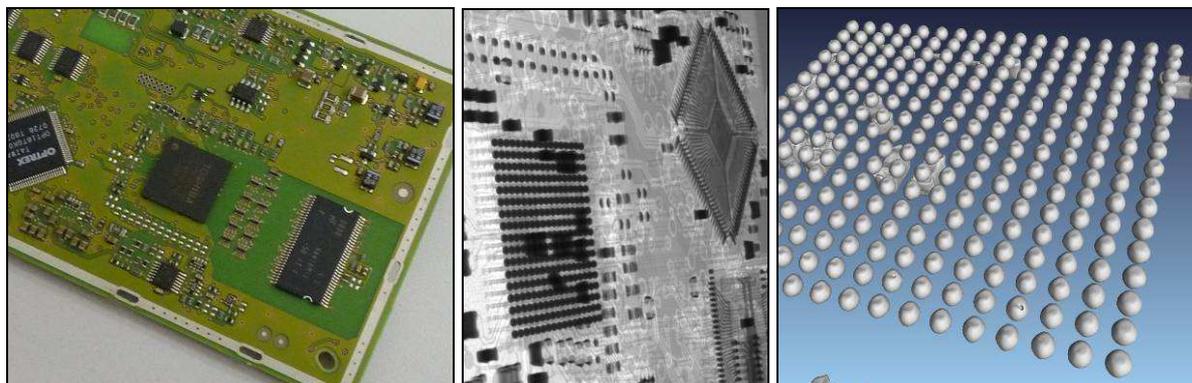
PCB a) real PCB b) x-ray picture, c) rendered point-cloud of solder
